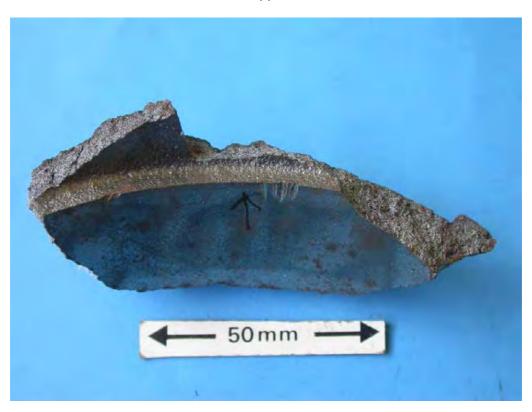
fractured piece from the motor casing, which exhibited fracture surfaces indicative of a cast iron (piece subsequently examined fractographically and metallographically).
